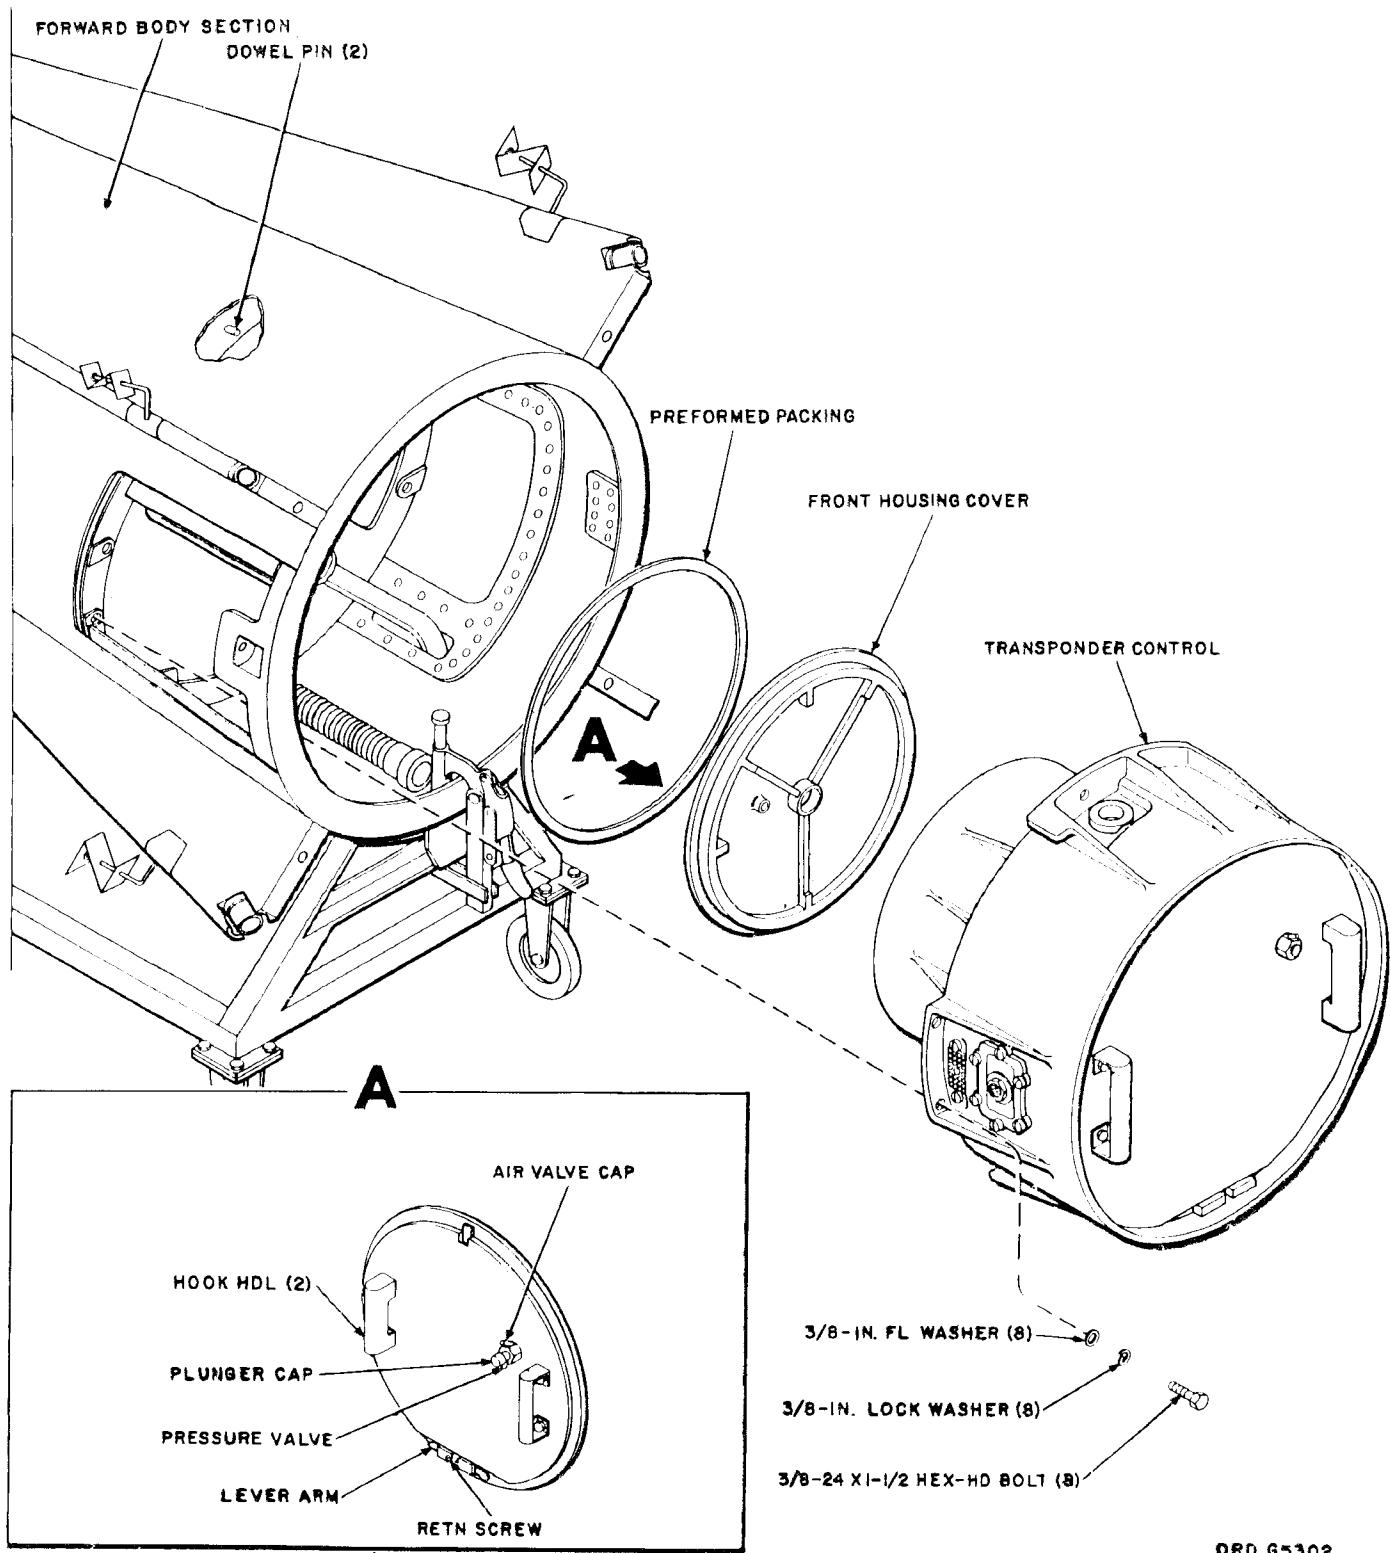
Partially exploded view of the forward body section and the transponder control group.
